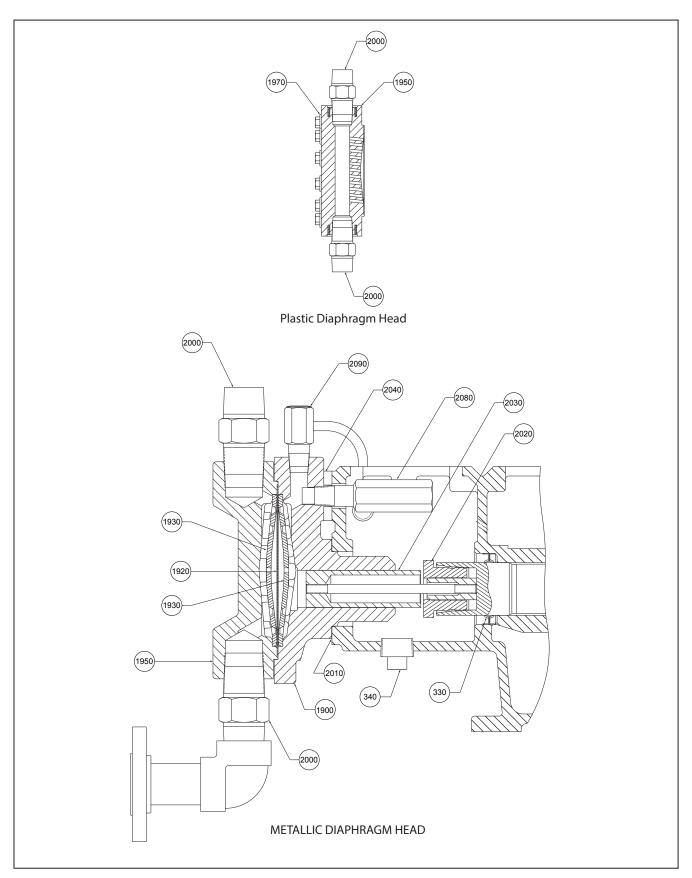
MILROYAL® B Disc Diaphragm Liquid End Assembly Drawing (C-102-2095-0006)
